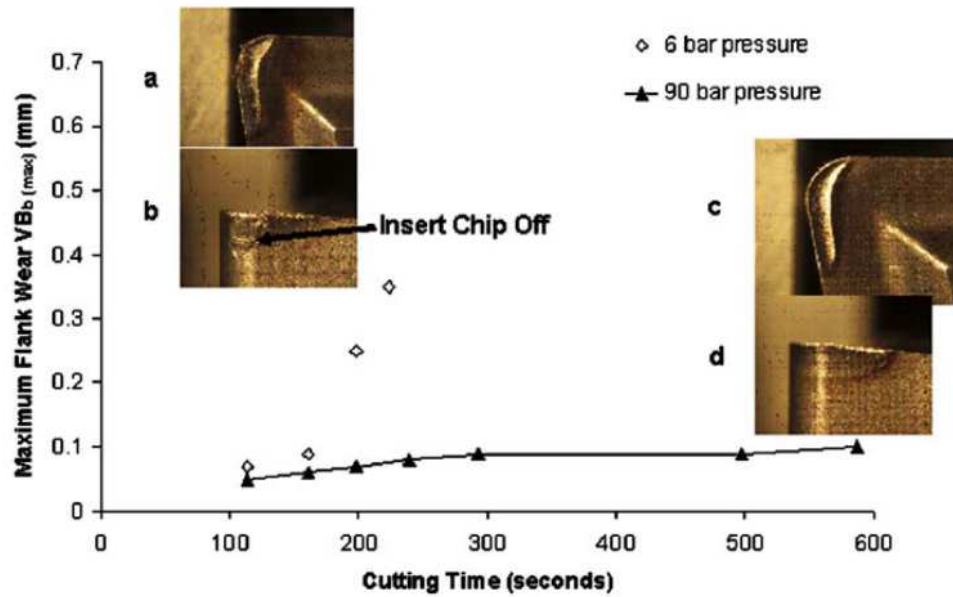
Tool wear along with (a) crater view and (b) flank view of the insert obtained after tool chip-off with the application of standard pressure coolant. (c) Crater view and (d) flank view of the insert obtained with the application of HPC) [48]
